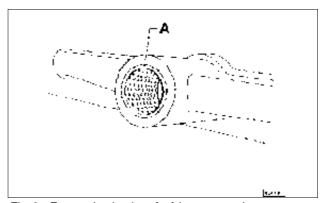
Ensure that bushes A of the centre axle are not worn, checking for well-evident indentations, remove the bushes by hammer and punch if necessary.
